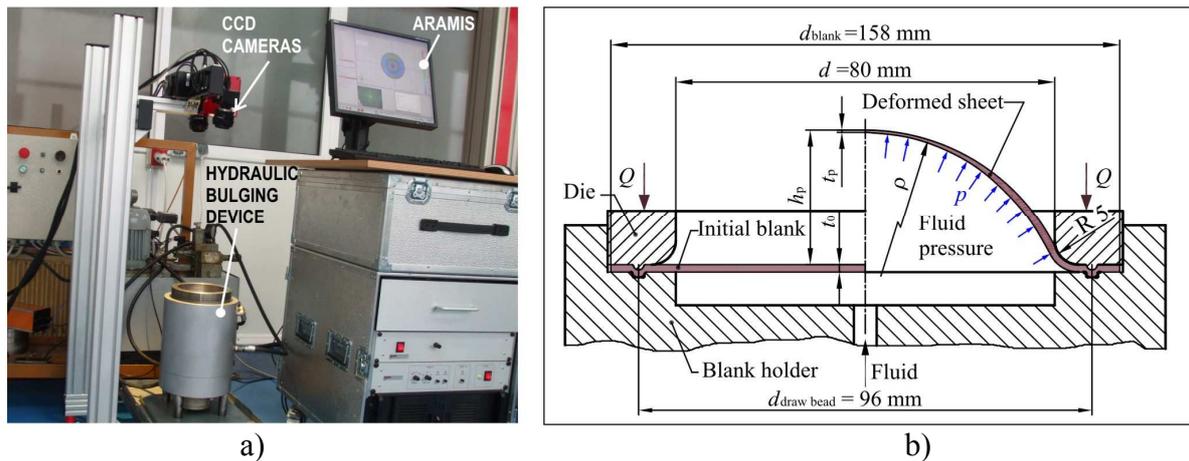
Hydraulic bulge test: a)-experimental devices; b)-geometry of the bulge test
